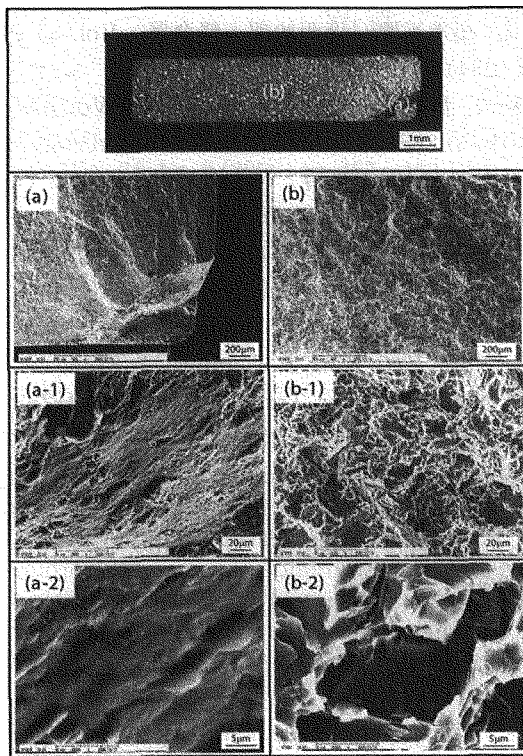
Fracture surface of fatigue test specimens in the base metal of (a) cold flake and (b) middle part : (a-1), (a-2) high magnification of (a) and (b-1), (b-2) high magnification of (b).
